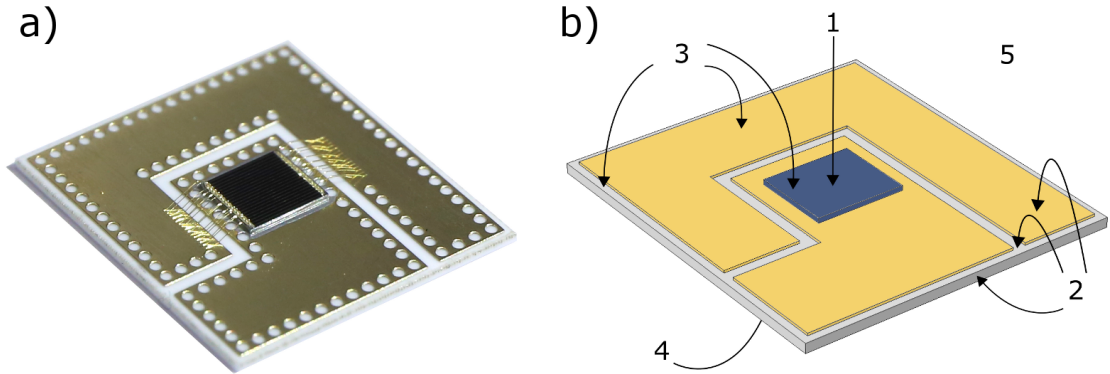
CAD drawing of the cell package used in the measurements.
